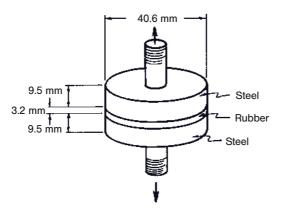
Bonded rubber-steel specimen for adhesion testing
